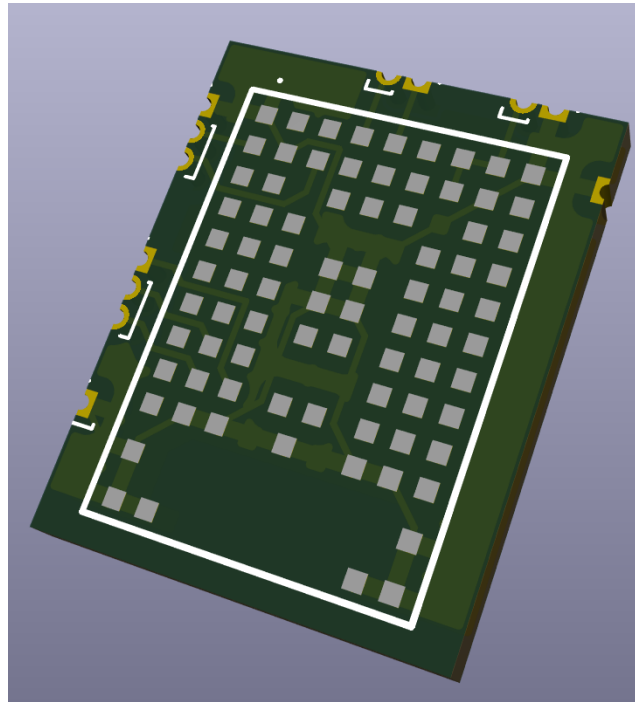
The NORA-B126 adapter board with dimensions of 16,75mm x 13,25mm
